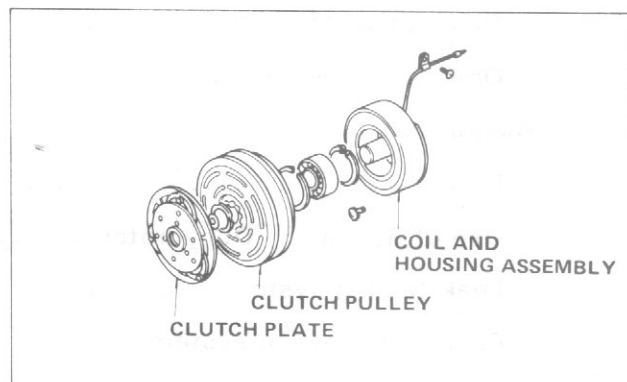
Compressor, Clutch, Pulley and Coil
